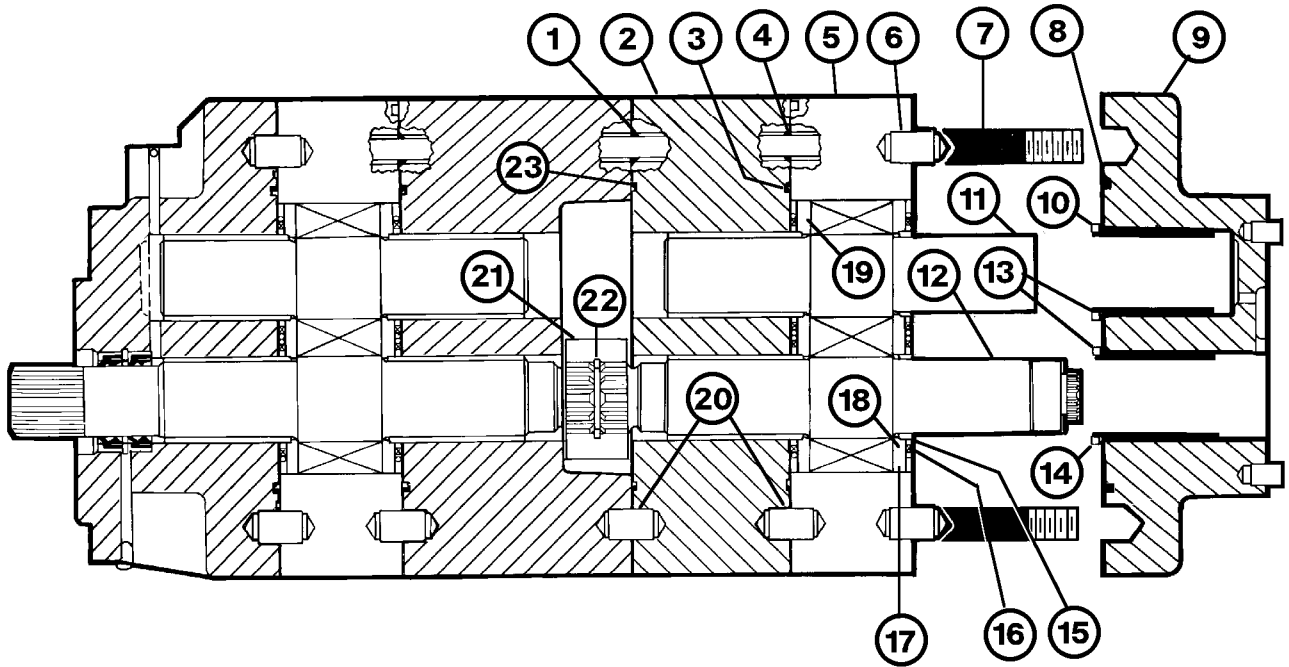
HOIST PUMP DISASSEMBLY (Rear Section)
